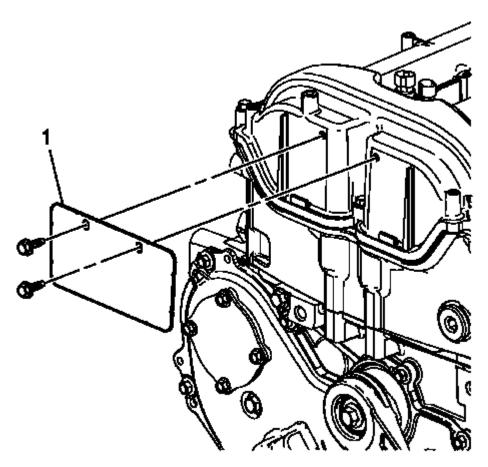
Camshaft Housing Cover Insulator Courtesy of GENERAL MOTORS COMPANY
